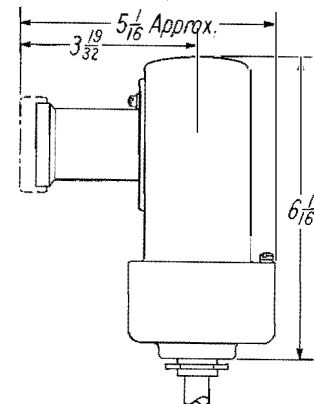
TYPES A AND B PHOTOTUBE HOUSINGS
